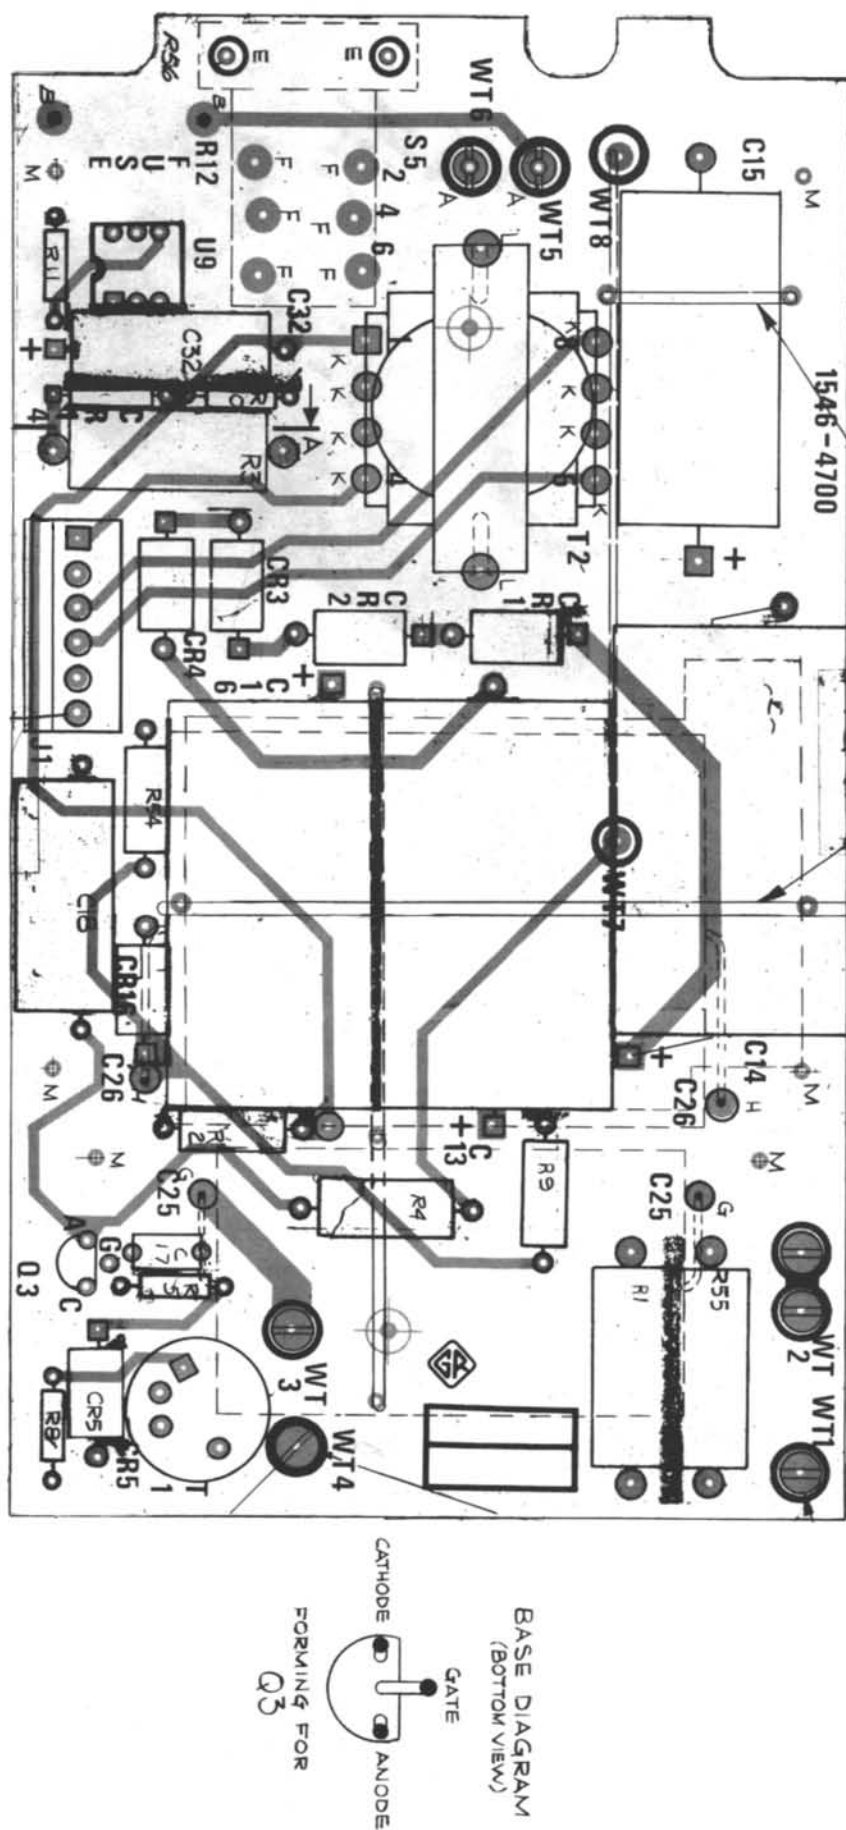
Etched Board Layout of the Power Supply Board (1546-4700)
